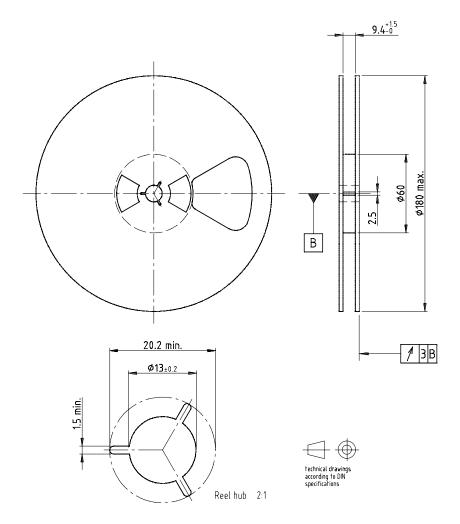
Issue: 3; 22.04.03
